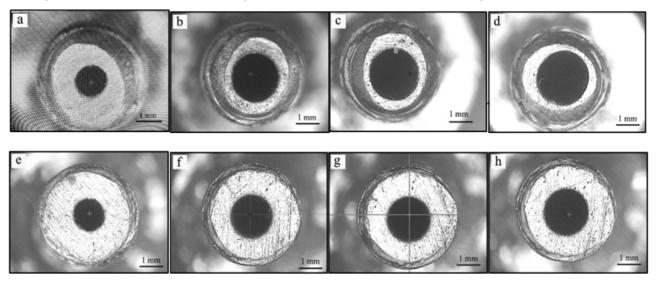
Enlargement of the nozzle's middle diameter using SiC abrasive: a) initial diameter, wear test b) 5 minutes, c) 10 minutes, d) 15 minutes of erosion time, and enlargement of the nozzle middle diameter using garnet abrasive: e) initial diameter, wear test f) 5 minutes, g) 10 minutes, h) 15 minutes of erosion duration
